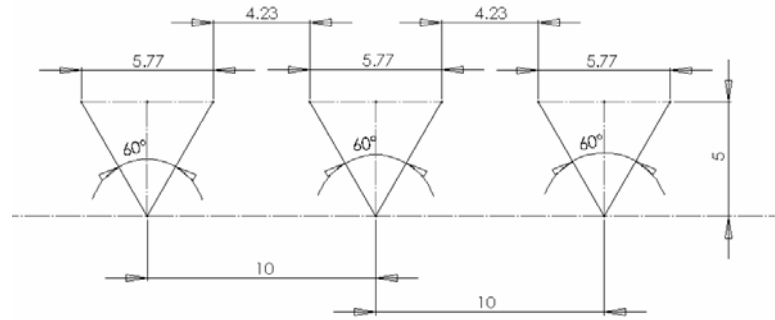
(b): Schematic drawing of the 60° grooves (all dimensions in μm)
